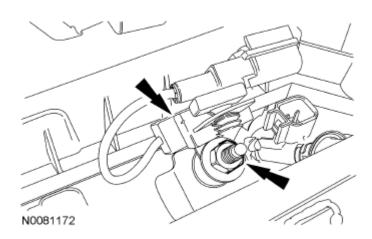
Locating Fuel Rail Insulator Courtesy of FORD MOTOR CO.
